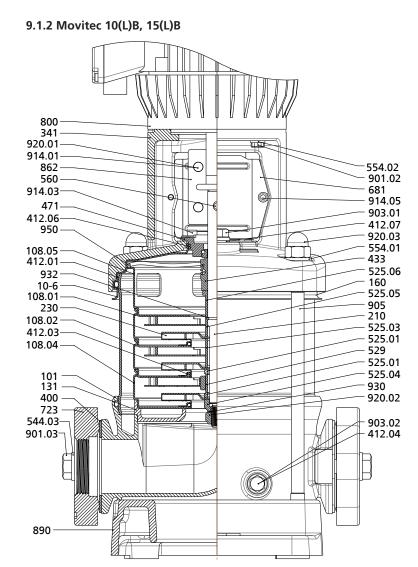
General assembly drawing of Movitec 10(L)B, 15(L)B
